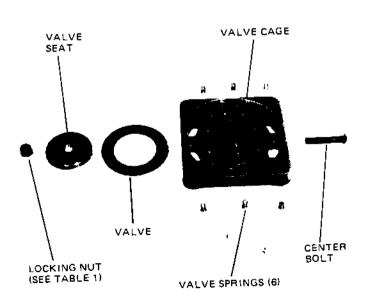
DISCHARGE VALVE ASSEMBLY
